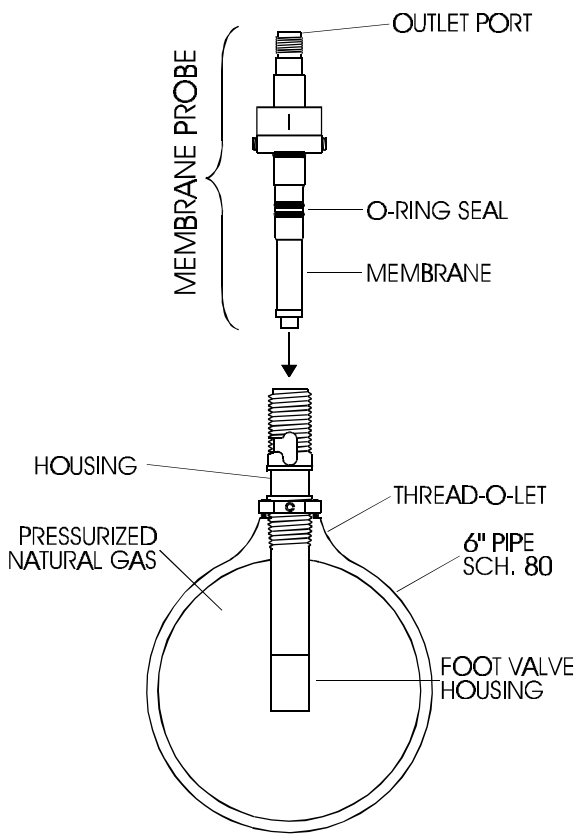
INSTALLED HOUSING & RETRACTED MEMBRANE PROBE
